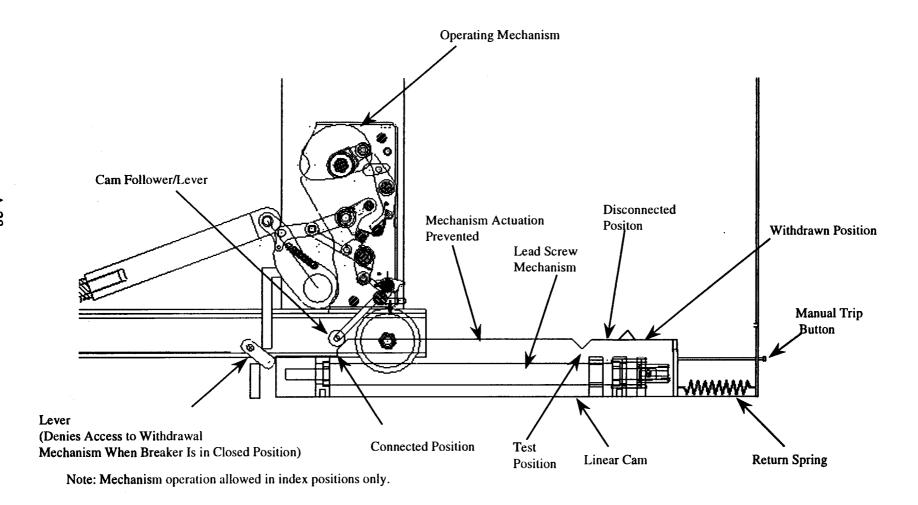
Circuit Breaker Interlock Mechanism Interfaces
